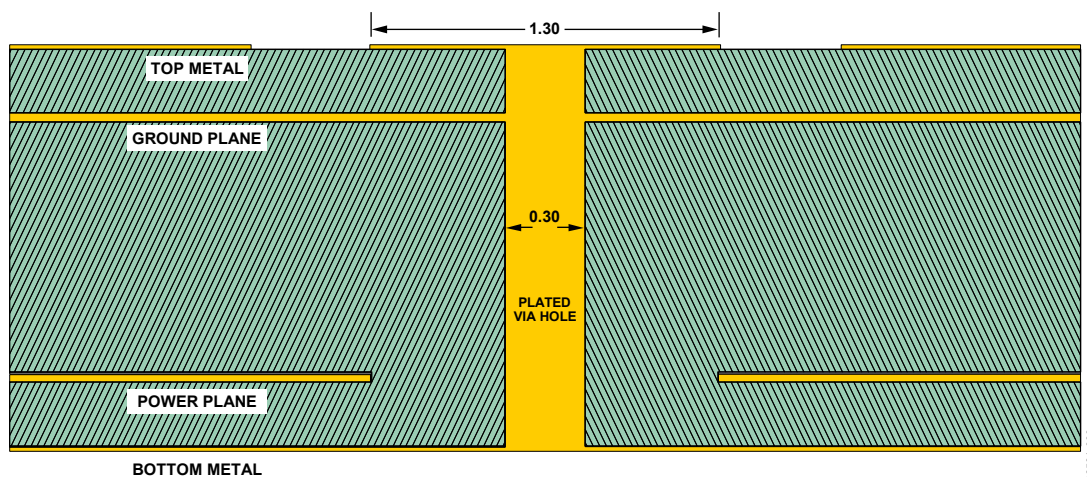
Cross-Section of 4-layer PCB Showing Thermal Via Connection to Buried Ground Plane (Dimensions in mm)
